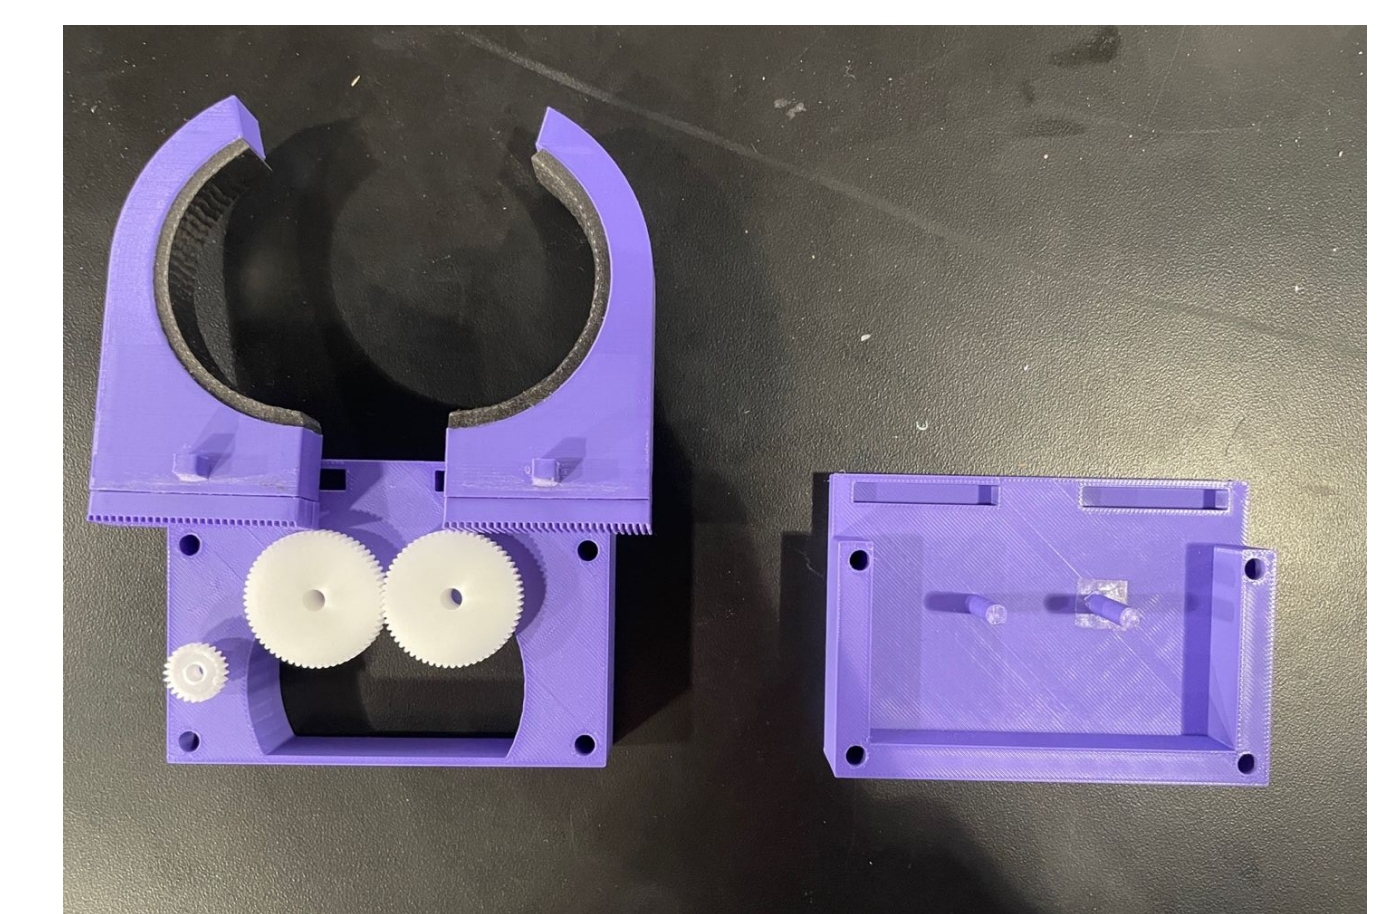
3D printed part of claw assembly: claw, gears, and base on the left, lid on the right
